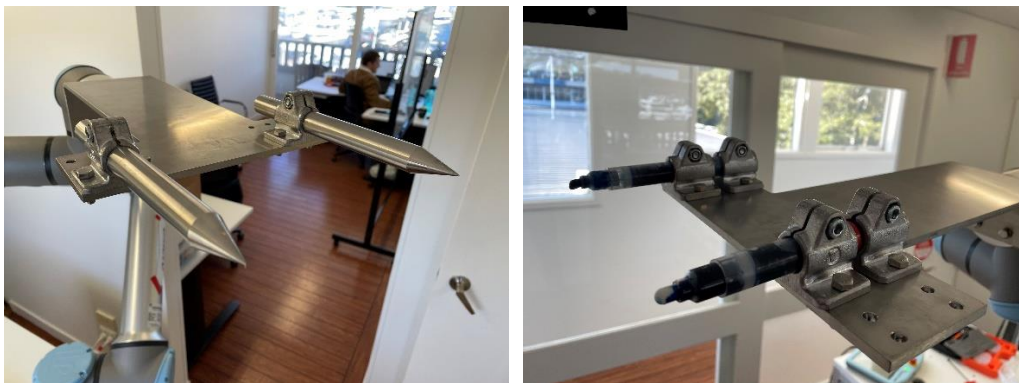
Marking tools (left) and pens (right) mounted to the plate
